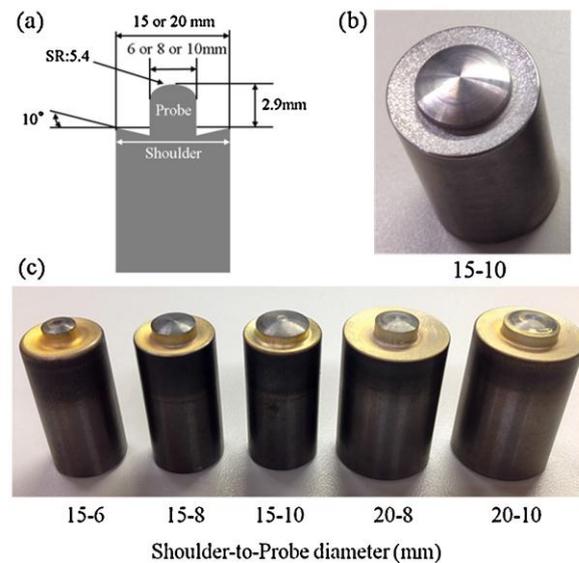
The pictures of FSW tools. (a) Schematic diagram of tool, (b) the appearance of tool before FSW (SD:15 mm, PD:10 mm), (c) the appearances of five kinds of tools after FSW.
